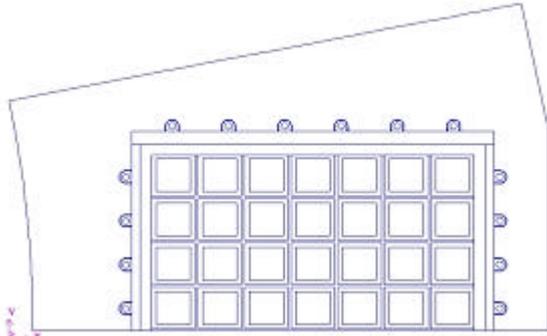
Cooling tube distribution in TF cross section (welding type)
